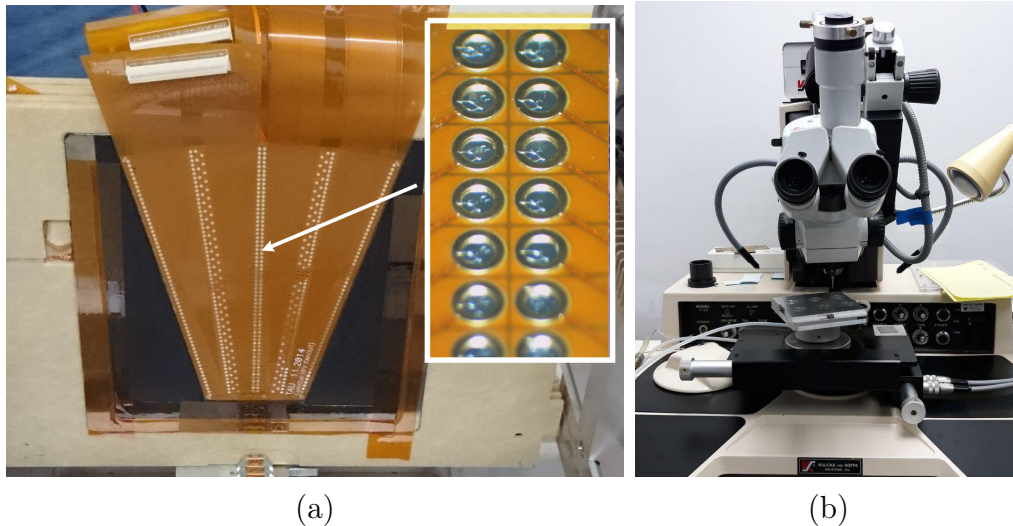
Ultrasonic soldering of contacts between the sensor and the front fanout (left figure). Ultrasonic soldering device (right figure).
